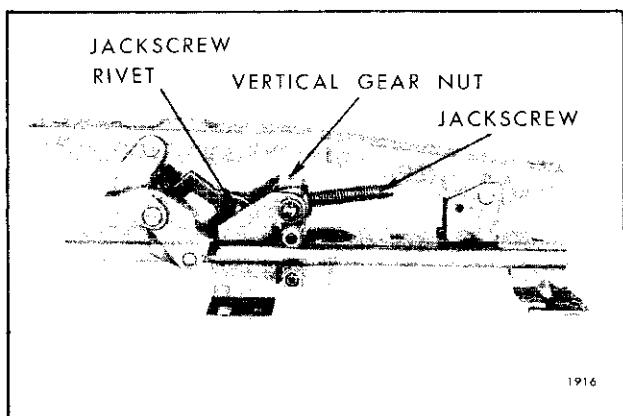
Four-Way Seat Adjuster - "A" Styles
